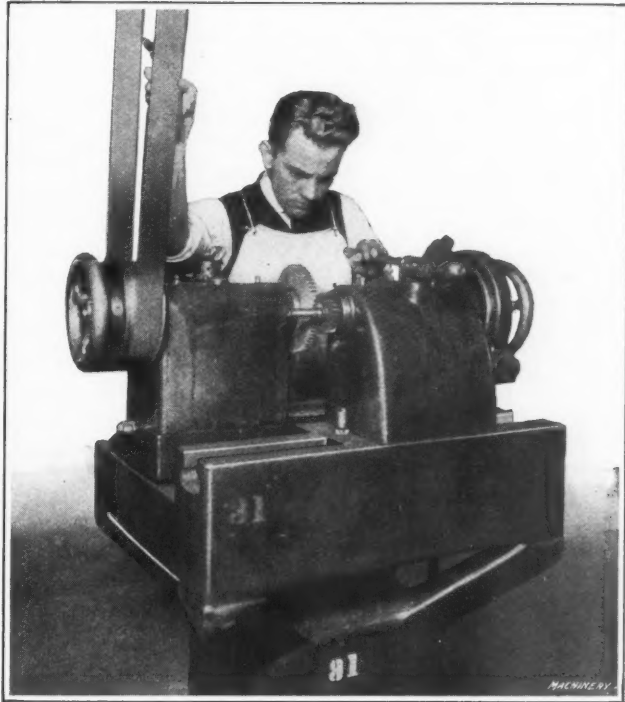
Gleason Machine for testing Running Properties and Tooth Bearing of Spur Gears
